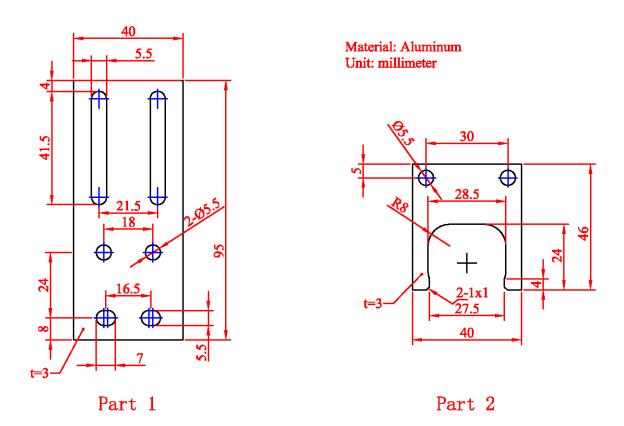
CAD diagrams for the supports of the solenoid valve (Part 1) and the bottle (Part 2).
